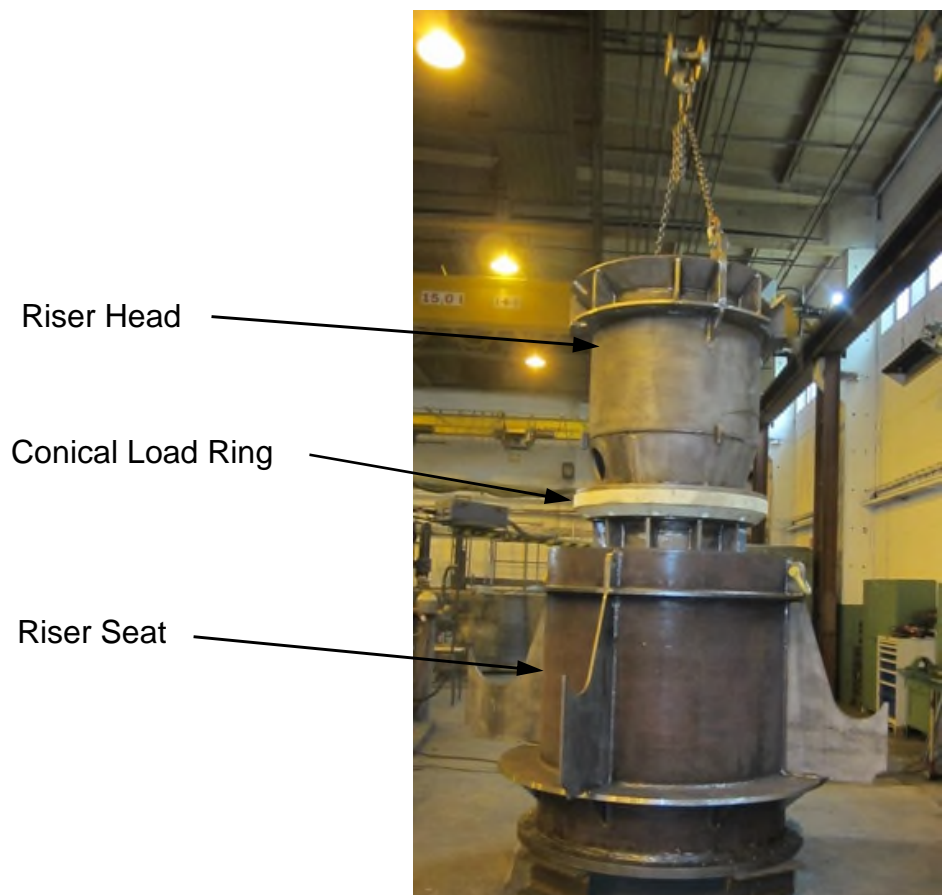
Factory trial fit of Riser Head into Riser Seat
